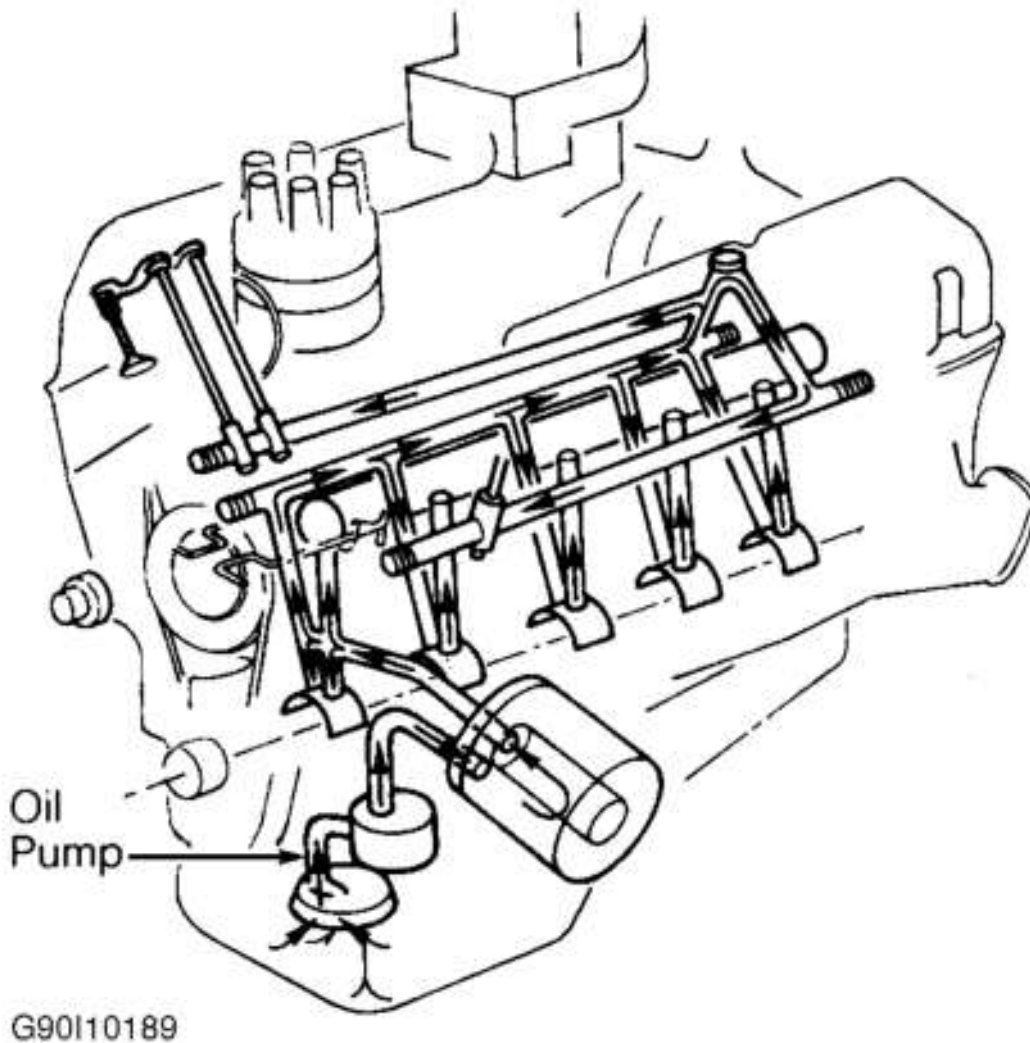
Cross-Sectional View Of Engine Oil Circuit
